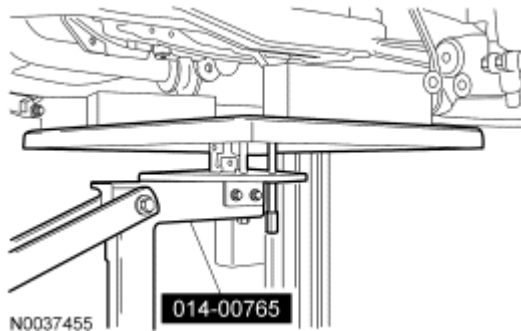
Positioning Special Tool (014-00765) Under Subframe Assembly
